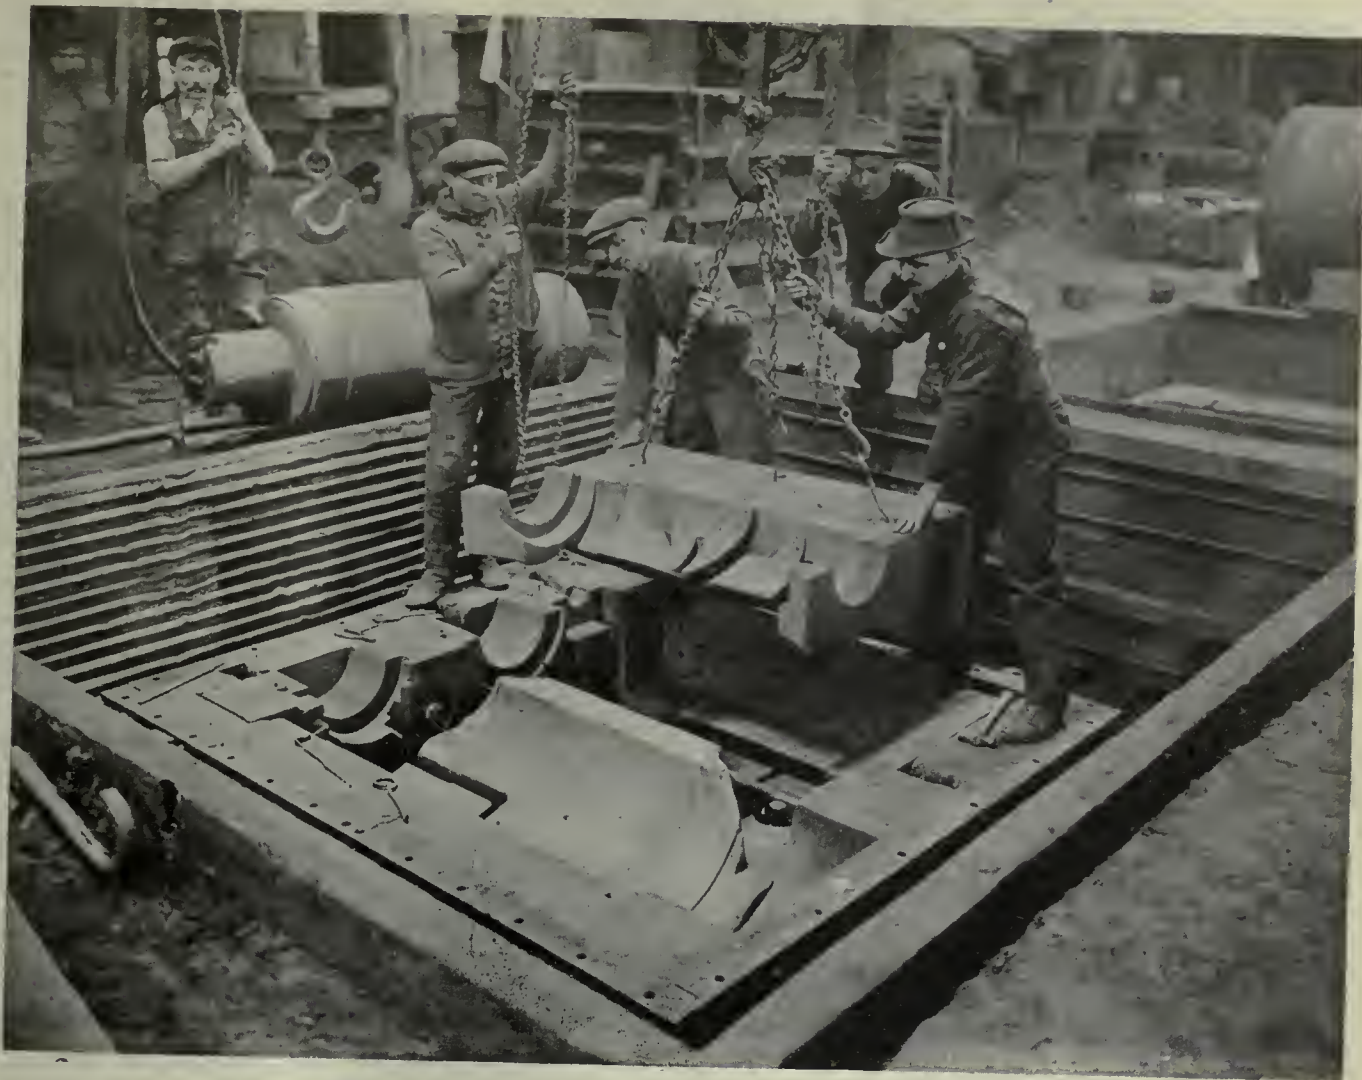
CORE BEING LOWERED IN PLACE IN DRAG OF HIGH PRESSURE PISTON VALVE CYLINDER.
